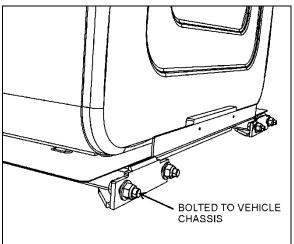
FUEL TANK SUPPORT MOUNTING BOLTS
